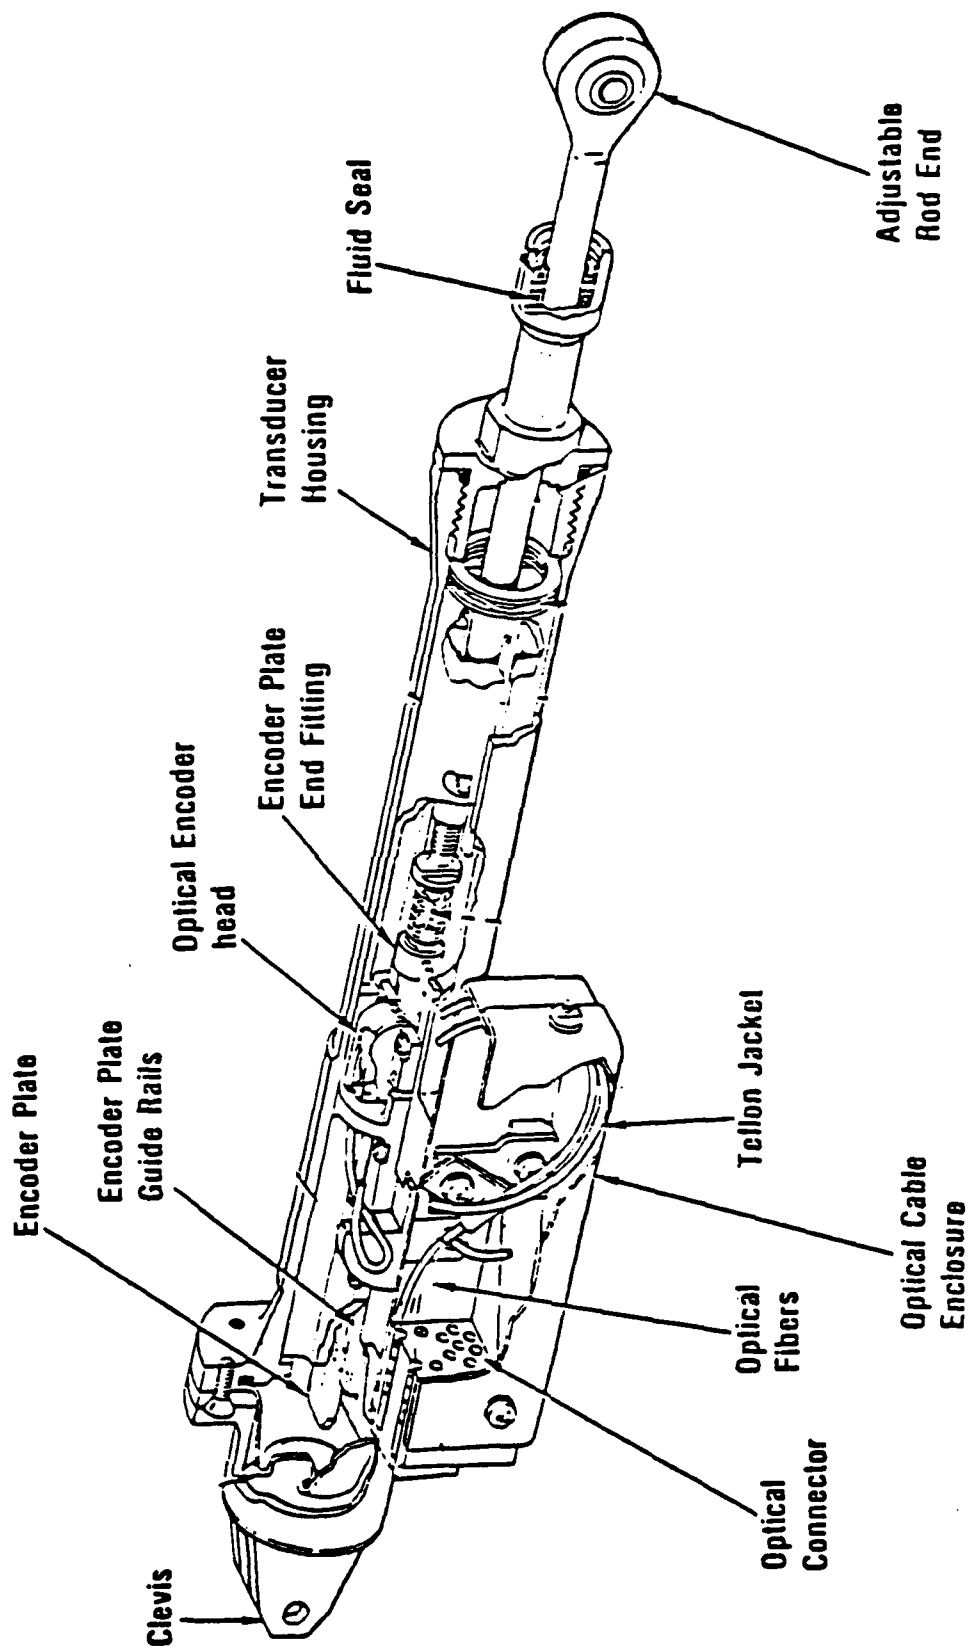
Linear Optical Displacement Transducer, Cut-Away View
